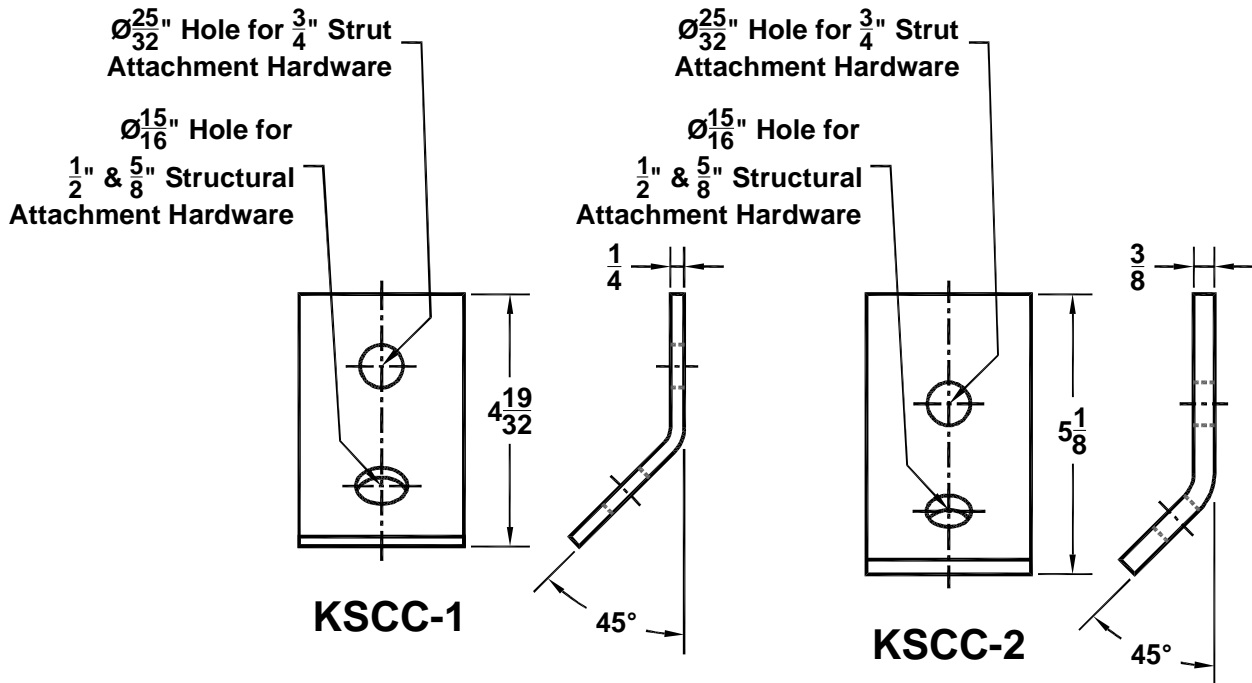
; KSCC-1 & -2 Brackets with Strut and Structure Attachment Holes Identified
